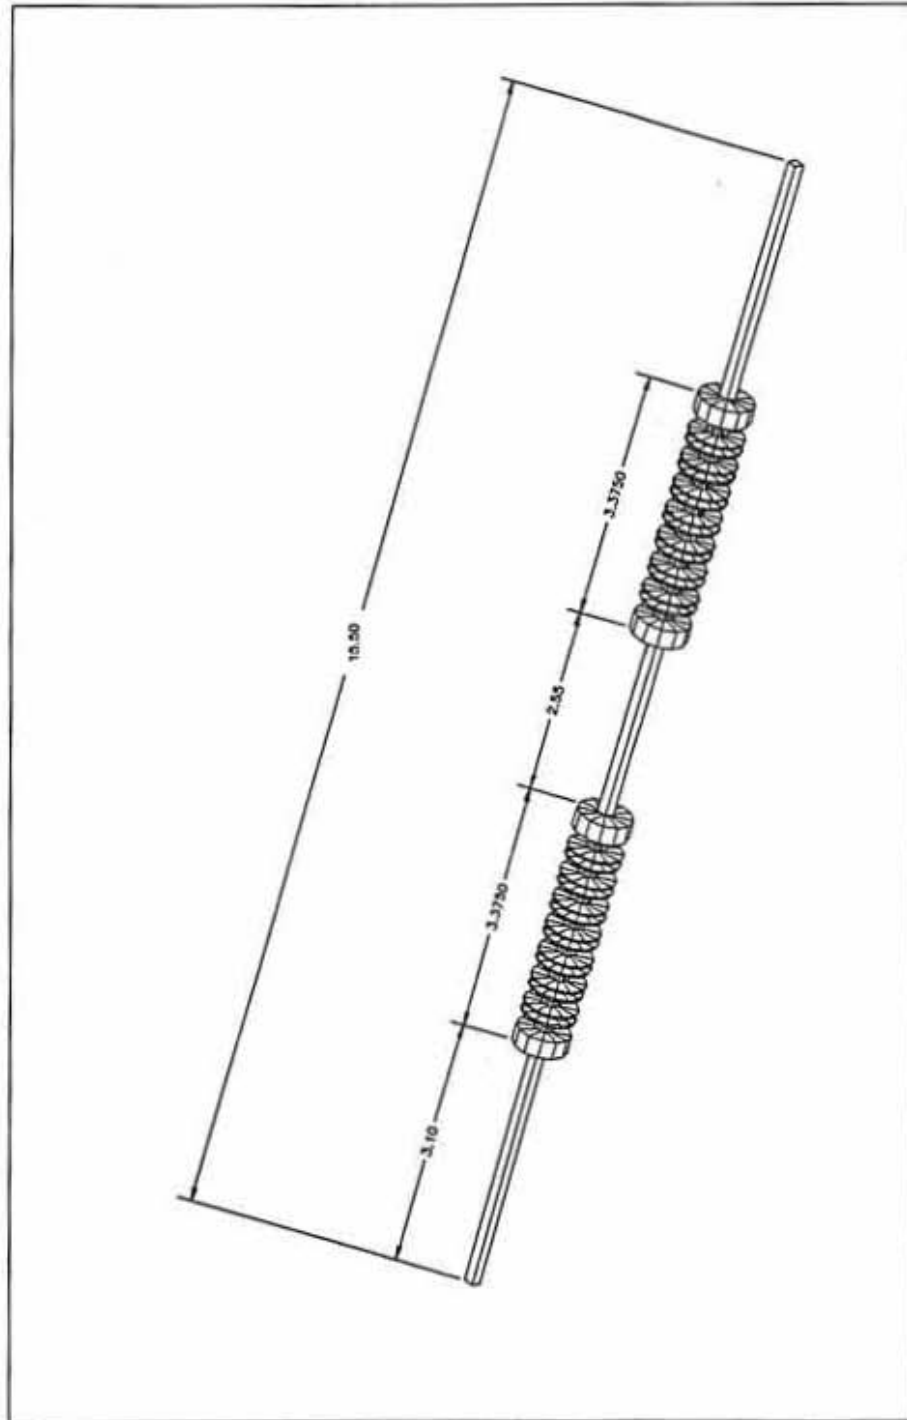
A sketch of the Polar and Wind search coil bobbins. Dimensions are given in inches.
